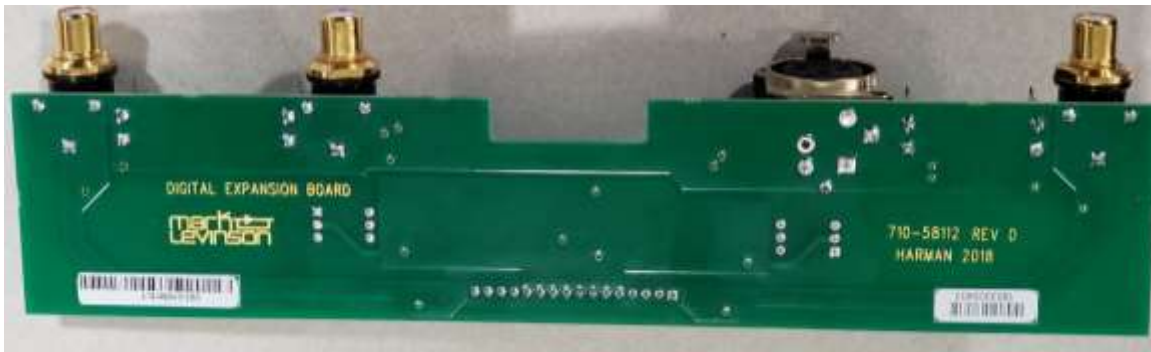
Photo of No5802 Digital Expansion PCB (Bottom View)
